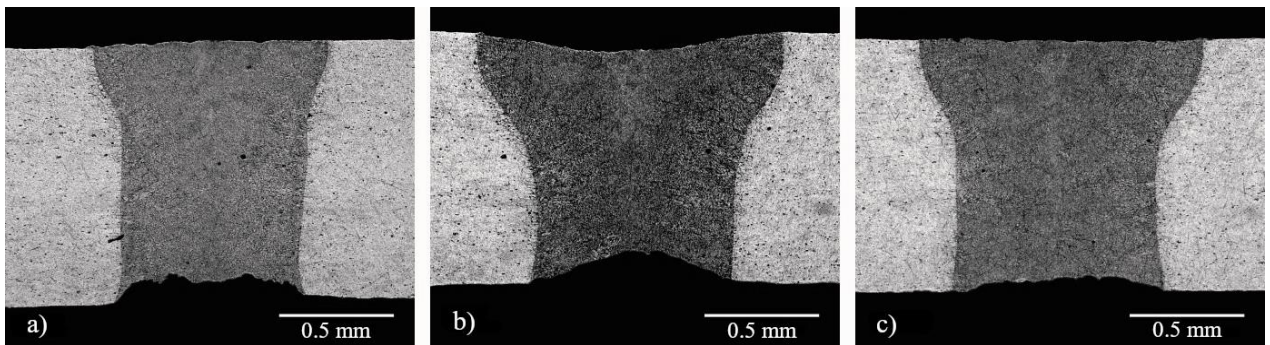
Weld bead cross section of a) P1, b) P2 and c) P3.
